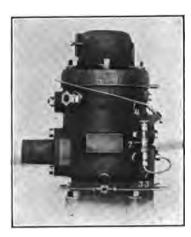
Water drip fitting as fitted to the "E" type Bolinder Engine.
